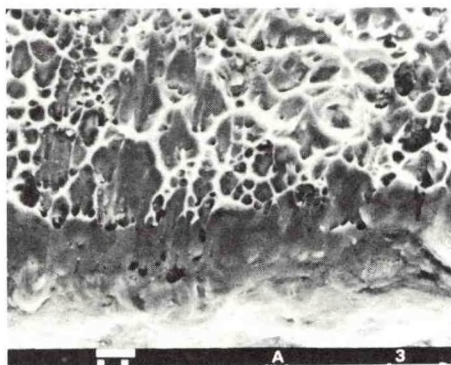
Fracture surface of crack initiation (X400)
